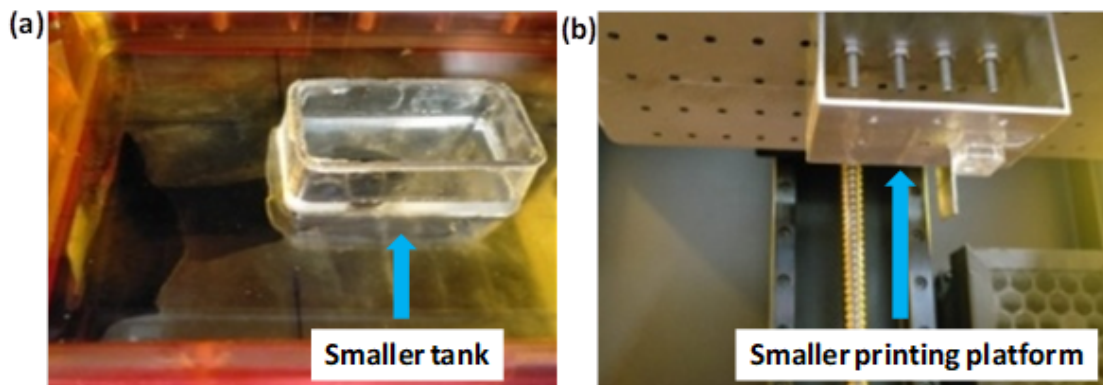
Modifications in DLP 3D printer. (a) Designing a smaller printing tank. (b) Designing a smaller printing platform.
